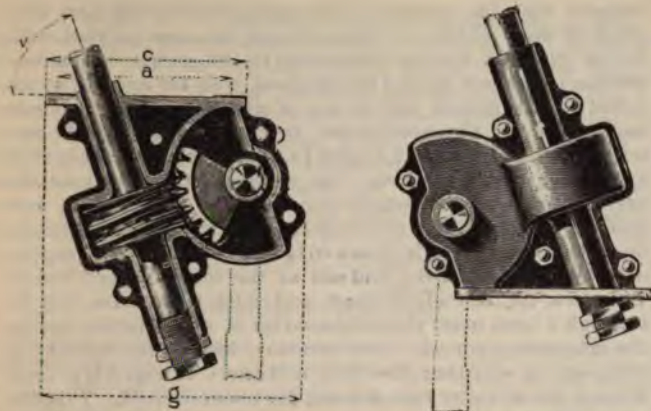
M. & B. STEERING GEAR REDUCTION MECHANISM.
